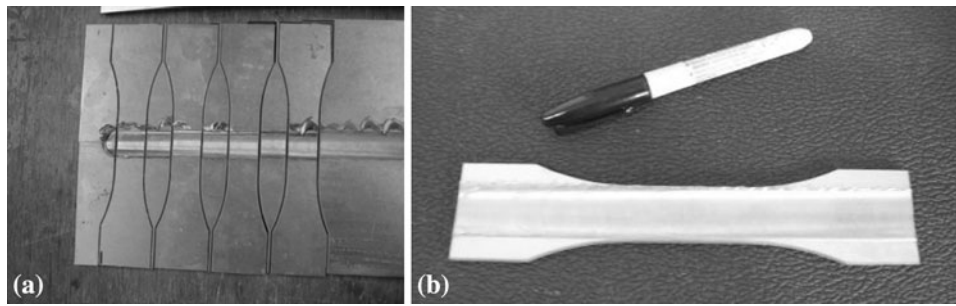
(a) Four of the fatigue test coupons cut from an FSW panel with transverse FSW welds. (b) A longitudinal FSW fatigue coupon
